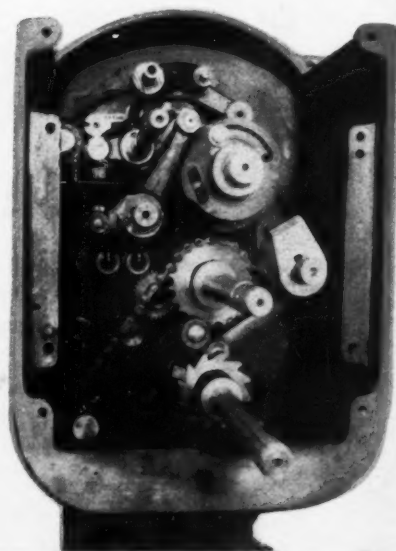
Totally enclosed mechanism lubricated by splash method (covers removed). Oil flinger is driven by roller chain
